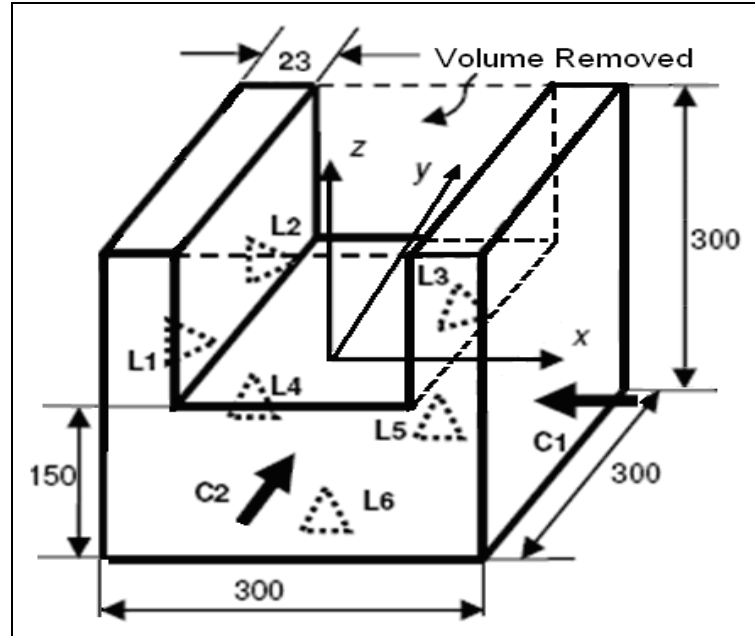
Final part and fixture layout (L1-L6: locators; C1-C2: clamps)
